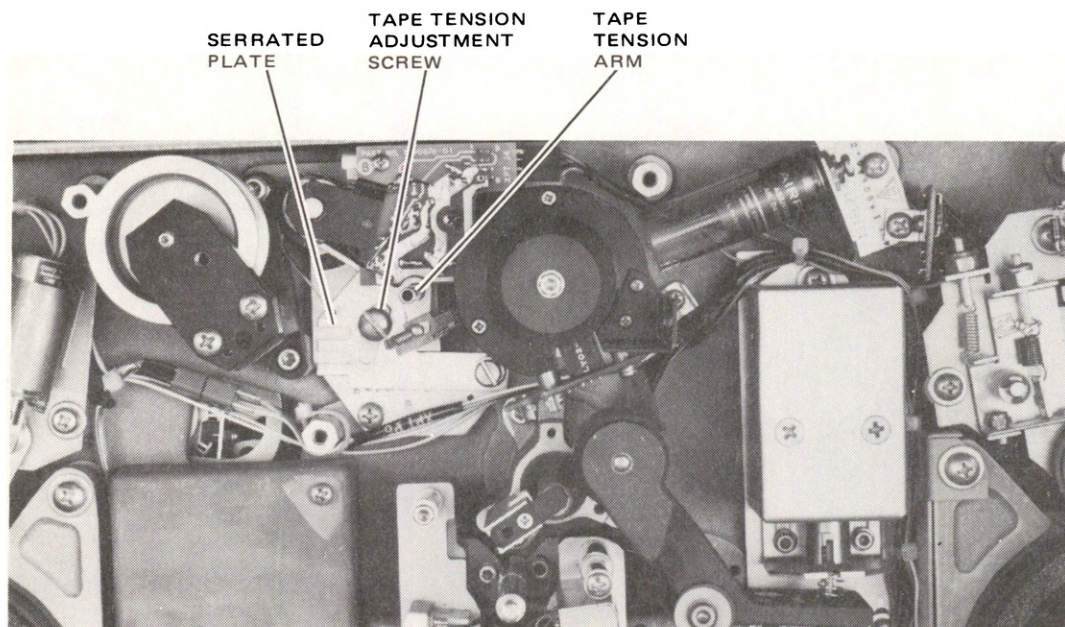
Supply Holdback Tape Tension Adjustment Screw
